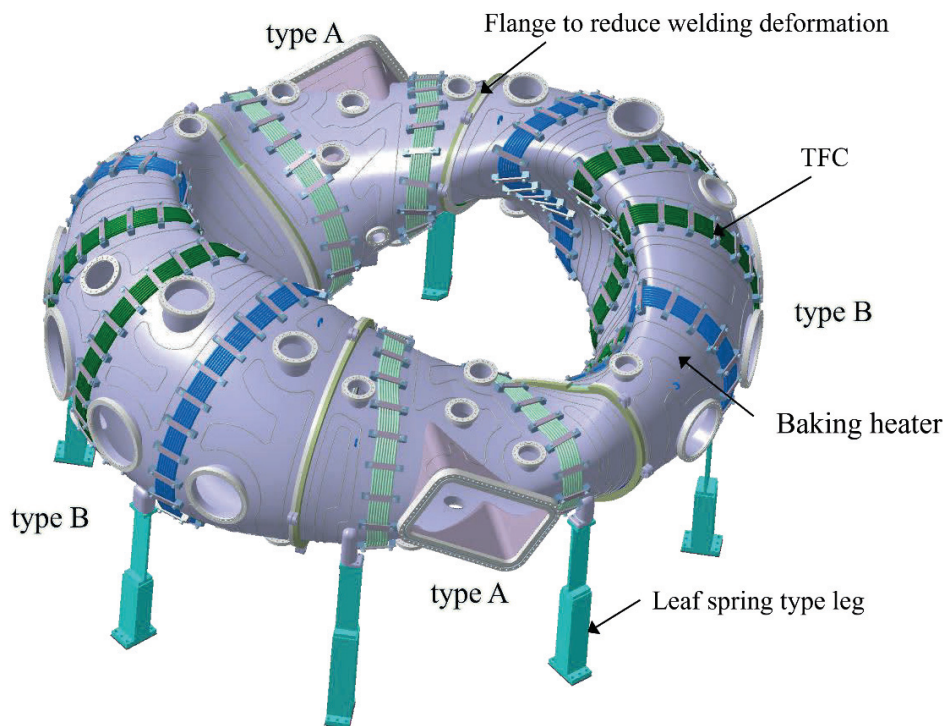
Schematic of the vacuum vessel. A torus-shaped vacuum vessel is made by joining four sectors with 2 types by welding. Each sector is assembled with modular coils, and a worker enters the vacuum vessel and welds them from the inside.
